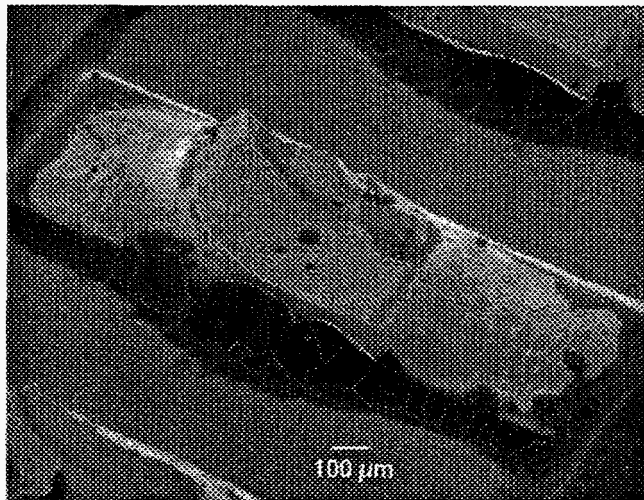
Scanning electron micrograph of the solder joint pull test failure morphology (circuit board pad) for CASTIN™ solder, imidazole PCB finish, and Sn-Pb lead finish on as-fabricated test vehicles.
